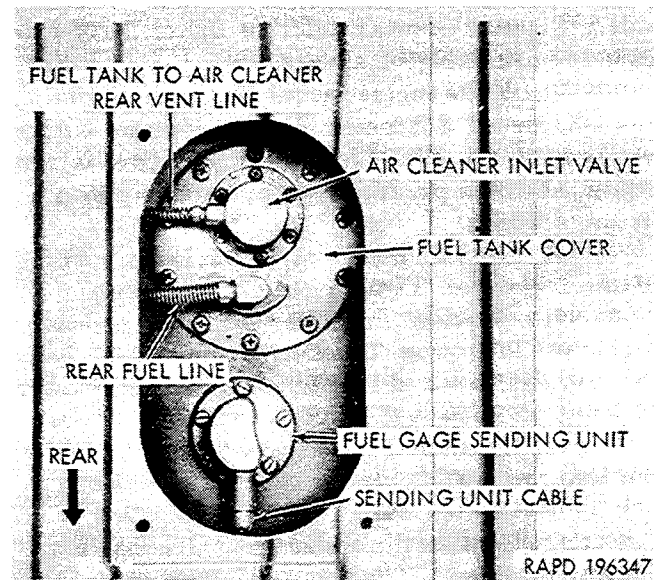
Fuel tank cover, air cleaner inlet valve, and fuel gage sending unit.
